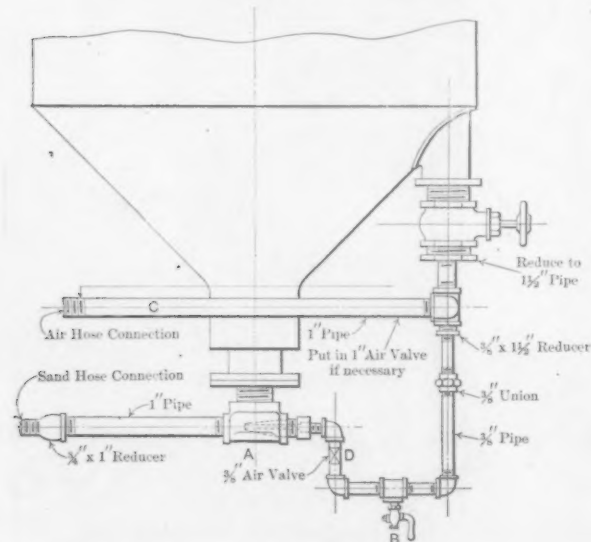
A Low-Pressure Sand Blast Machine Adapted to the Kelly High Pressure System.
